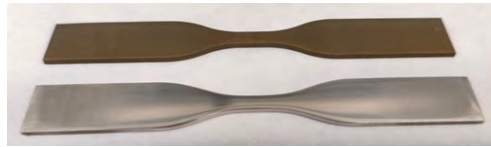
Representative HCF specimen obtained by electrical discharge machining from a PBF-LB/M pillar. The upper specimen shows the as-cut condition after EDM, whereas the lower specimen shows the surface condition after preparation using the abrasive paper sequence 320, 600, 1200 and 2500 grit.
